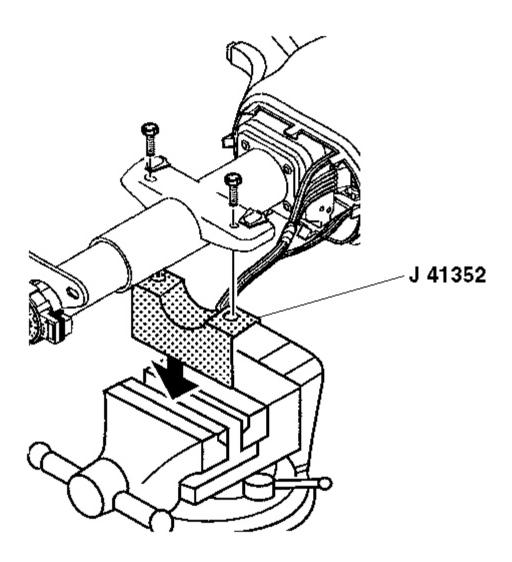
Installing Steering Column Onto J 41352 Courtesy of GENERAL MOTORS CORP.
